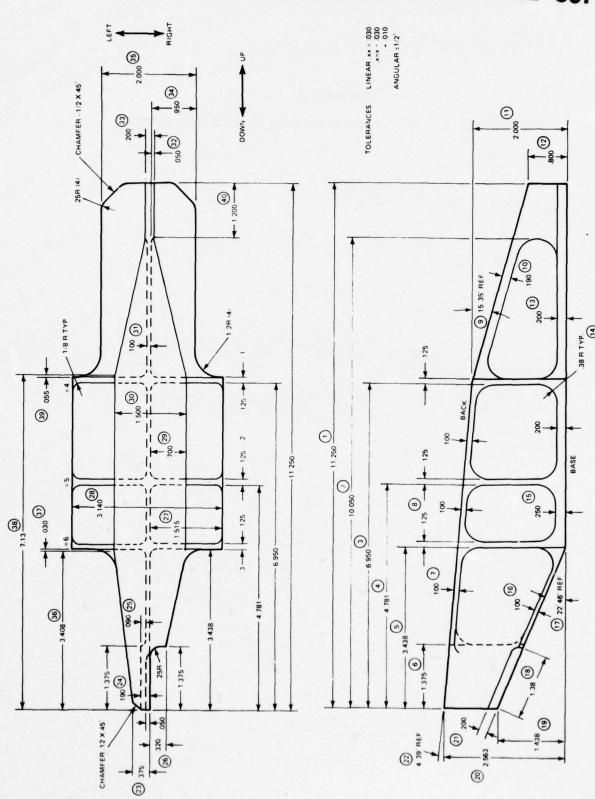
Grumman Engineering Drawing for Part No. A51B21683 (Fuselage Brace)
